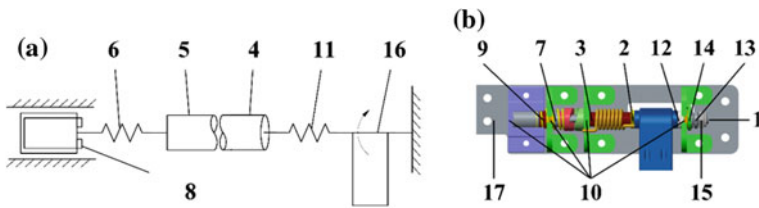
Schematic diagram of one side of rotating tablet stand. a Concept. b CAD model
